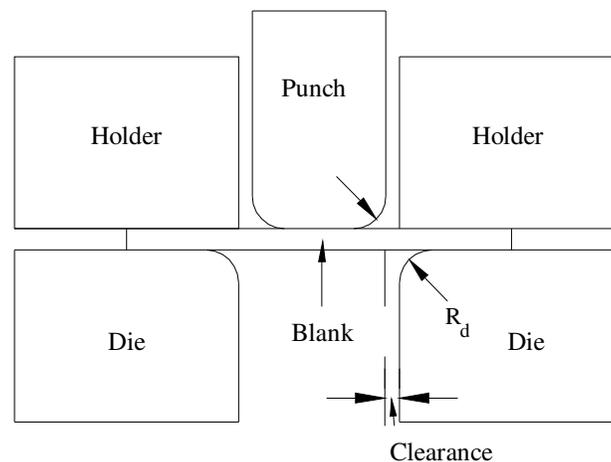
Geometry of punch, die, blank holder, sheet and clearance.
